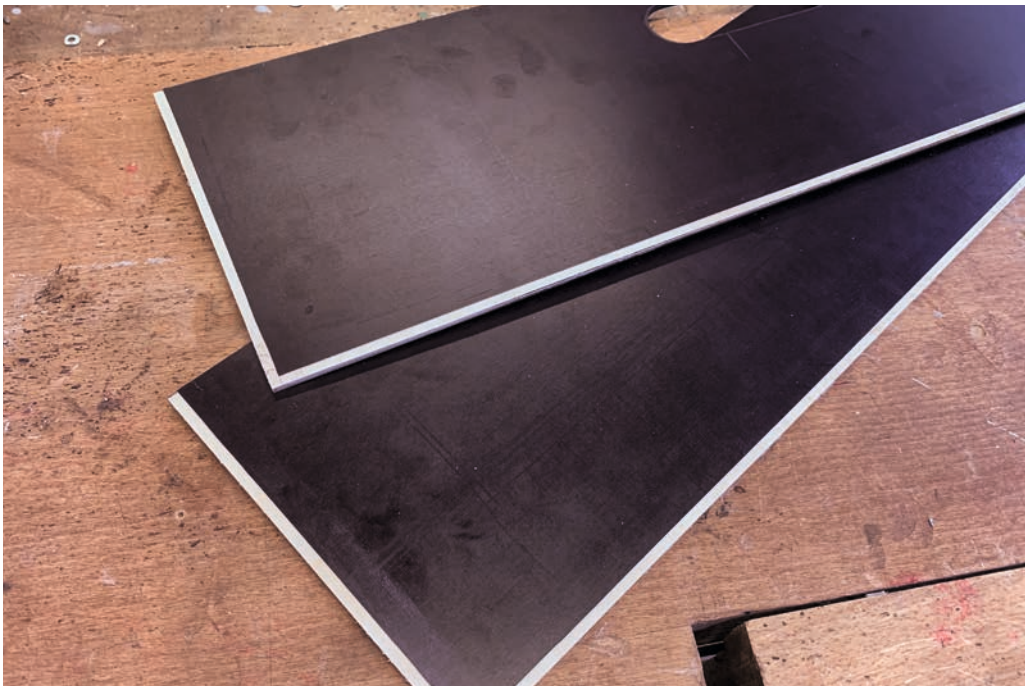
The drawer frontplates had to be neatly milled before gluing.
